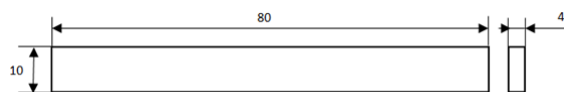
Shape and dimensions (mm) of the pieces used in the Flexural test (ASTM D6272)
